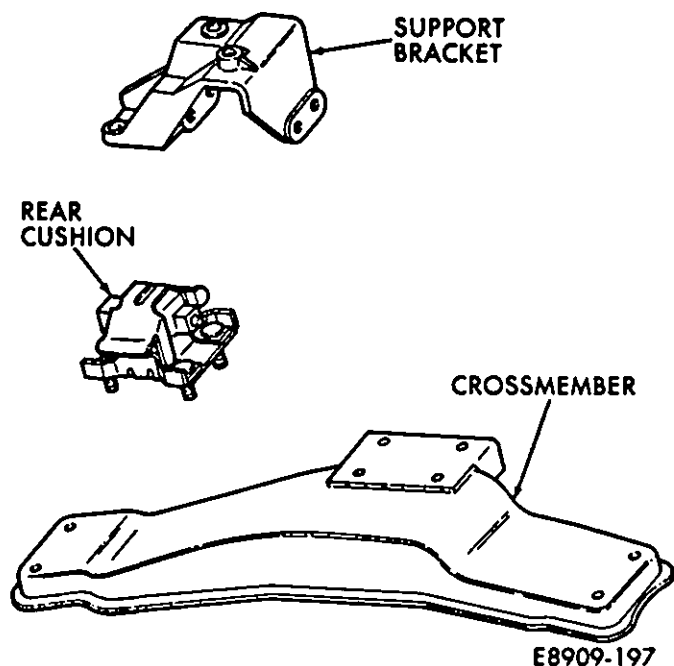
Rear Cushion/Crossmember/Support Bracket Alignment
